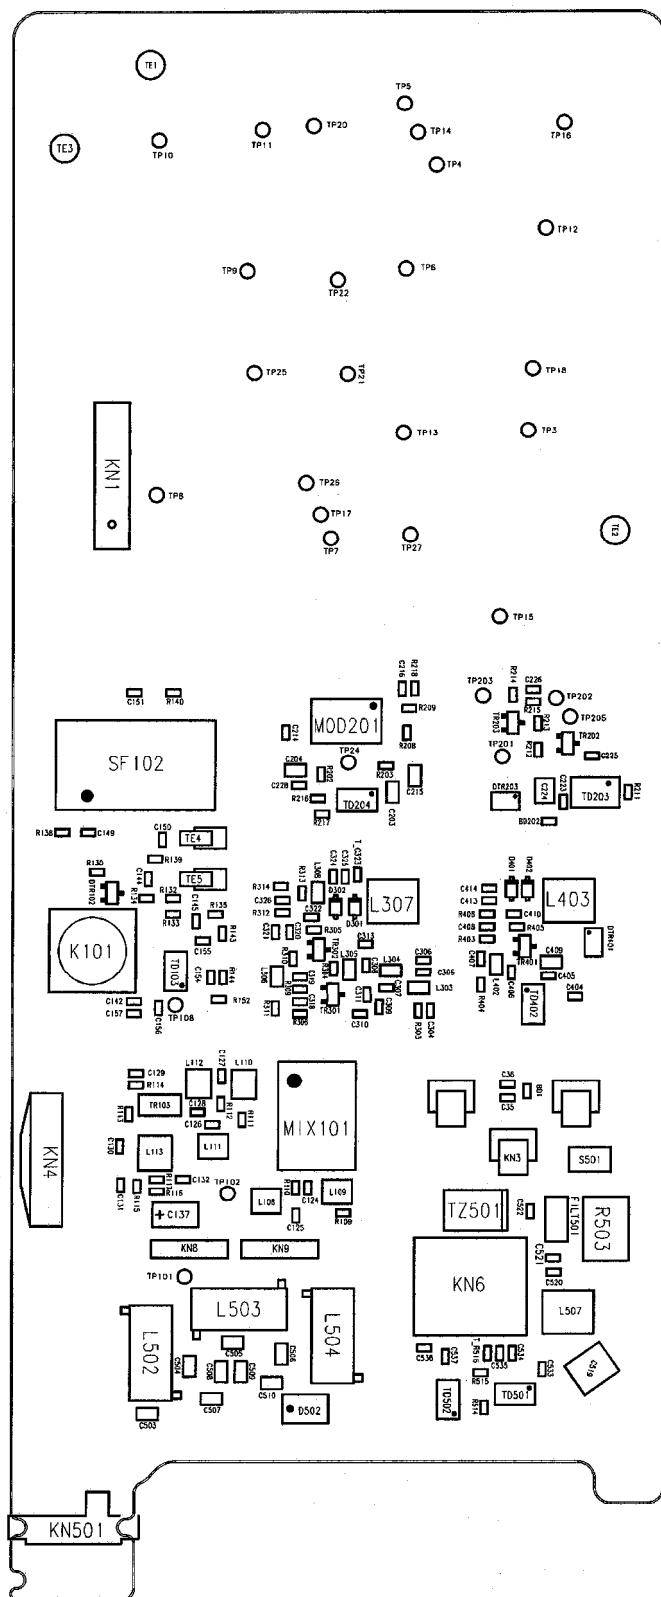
VHF RF and Control PCB Assembly Bottom Side
